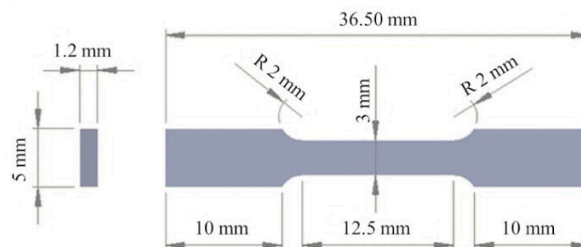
Dimensions of miniature tensile test specimens used in dilatometry experiments.
